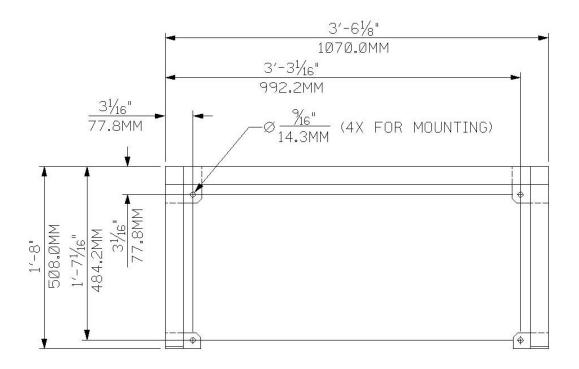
Mounting Hole Locations 1x1 Cylinder Rack or 1x1 Cylinder Euro Rack
